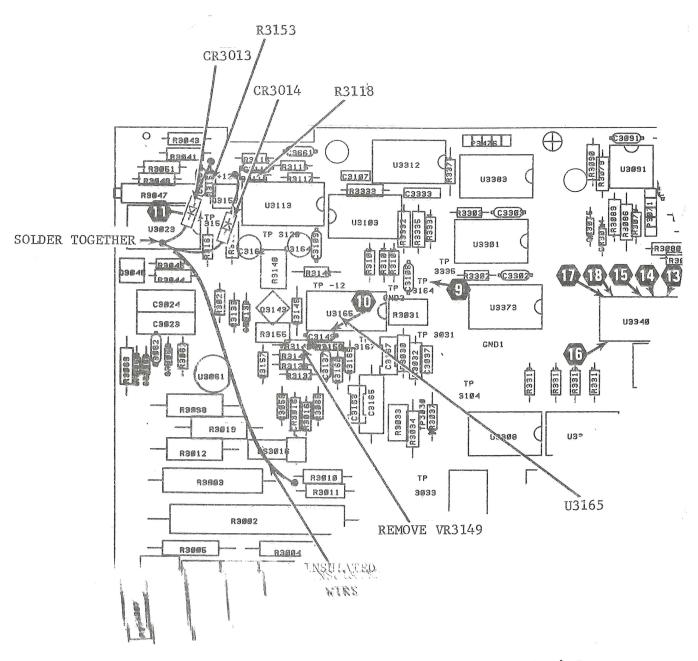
(DM44) Partial Main circuit board (A1) showing locations of added and removed parts.
